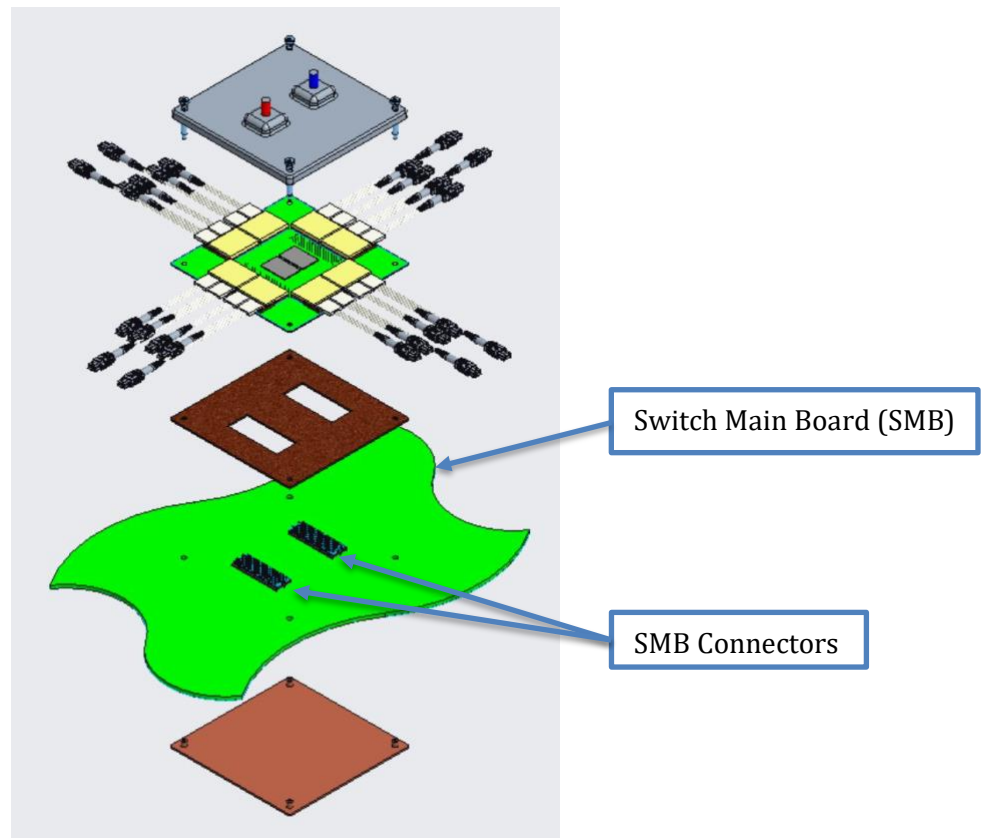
Exploded view of CPO assembly showing bottom-side electrical connectors
